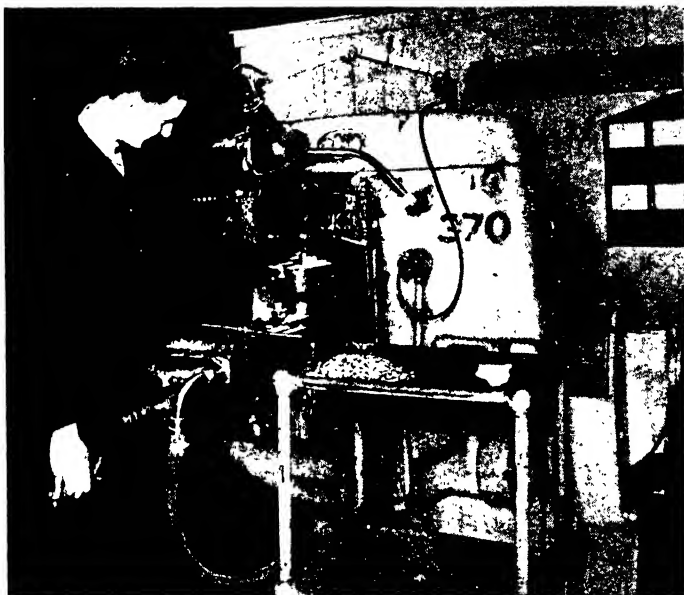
APPRENTICE FITTER AND TURNER MILLING GROOVE ON HEADS OF SET SCREWS
